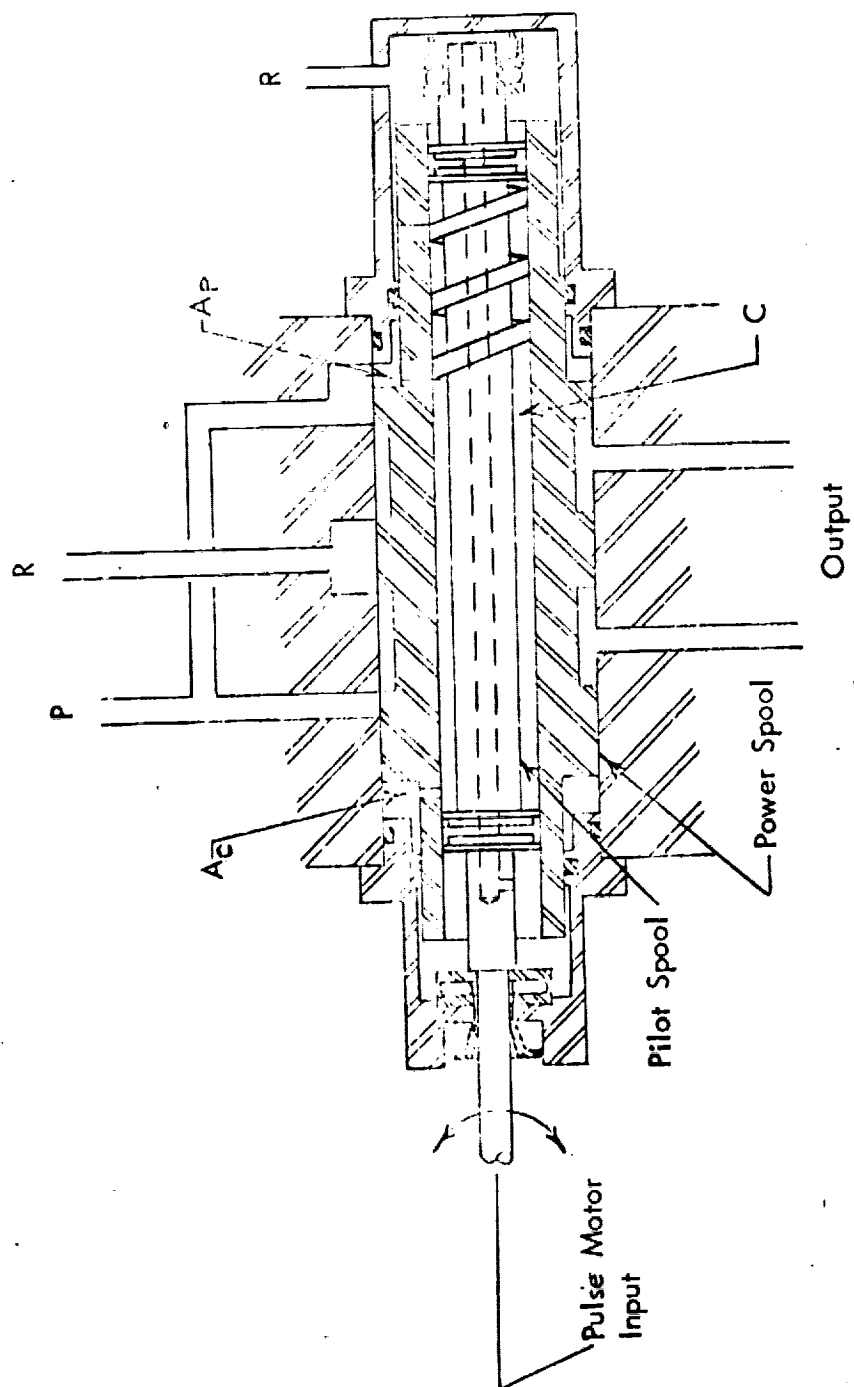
PULSE MOTOR WITH HYDRAULIC HELIX COUPLING TO PILOT VALVE CONTROLLED POWER SPOOL
